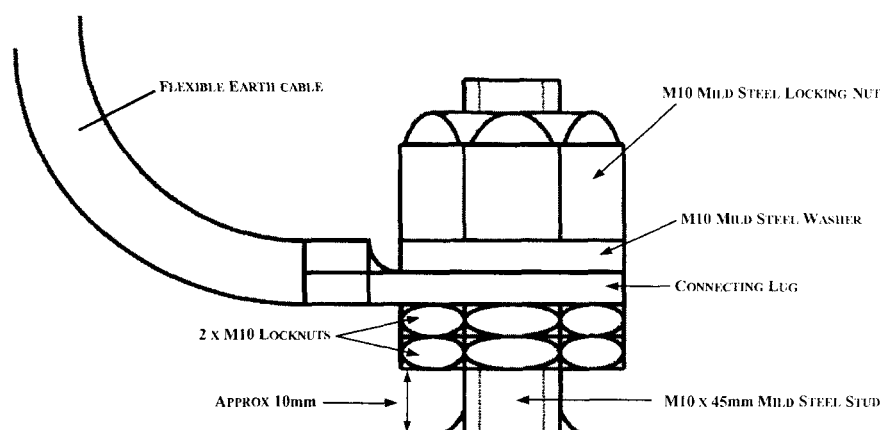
DIAGRAM OF EARTH CABLE AND STUD ASSEMBLY CONNECTED TO A STEEL STRUCTURE OR EQUIPMENT.
